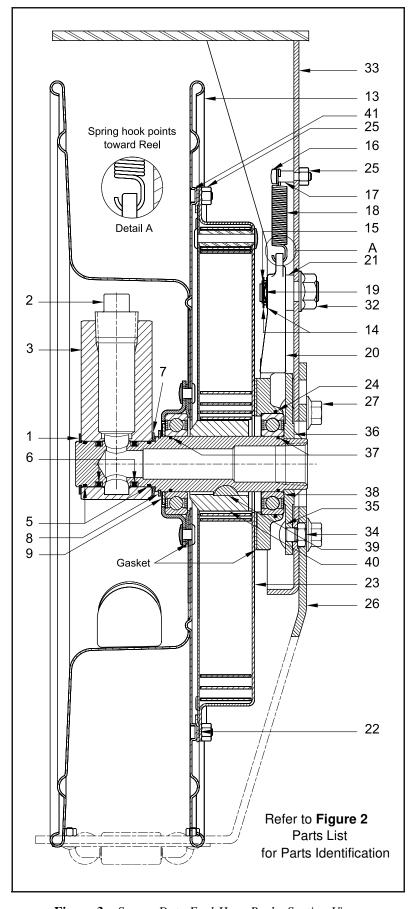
Severe-Duty Fuel Hose Reel - Section View
